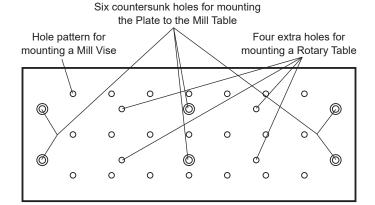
Mill Tooling Plate hole pattern. Drill additional holes as needed for your particular jobs.
